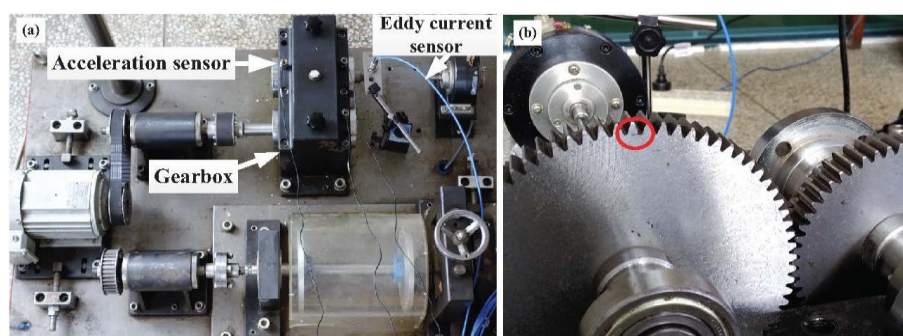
Test rig: (a) gearbox and, (b) a crack at the root of the driven gear
